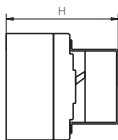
Overall and mounting dimensions of the motor driven mechanism
